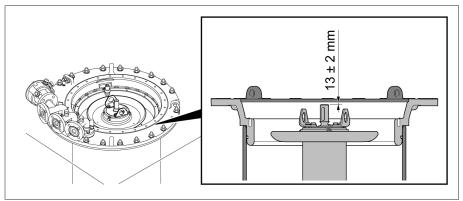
Distance between the upper rim edge of the adapter shaft of the diverter switch insert and the mounting surface of the on-load tap-changer head
